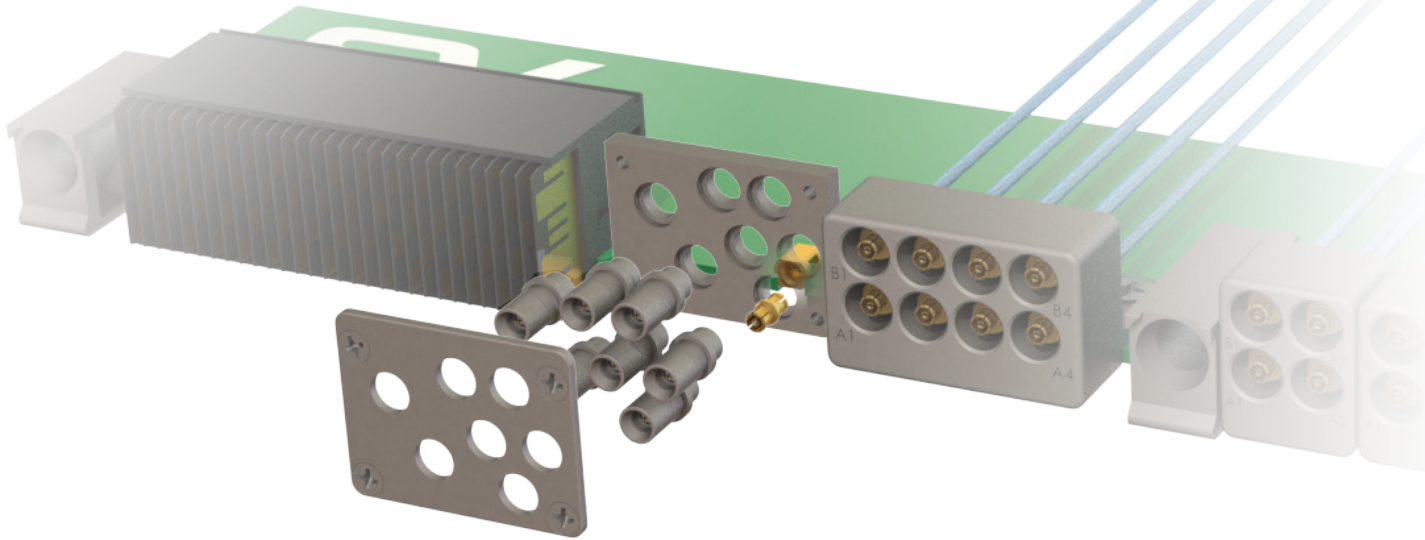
Plug-in card exploded view, catalog SMPM PCB launch and bullet shown on carrier card
